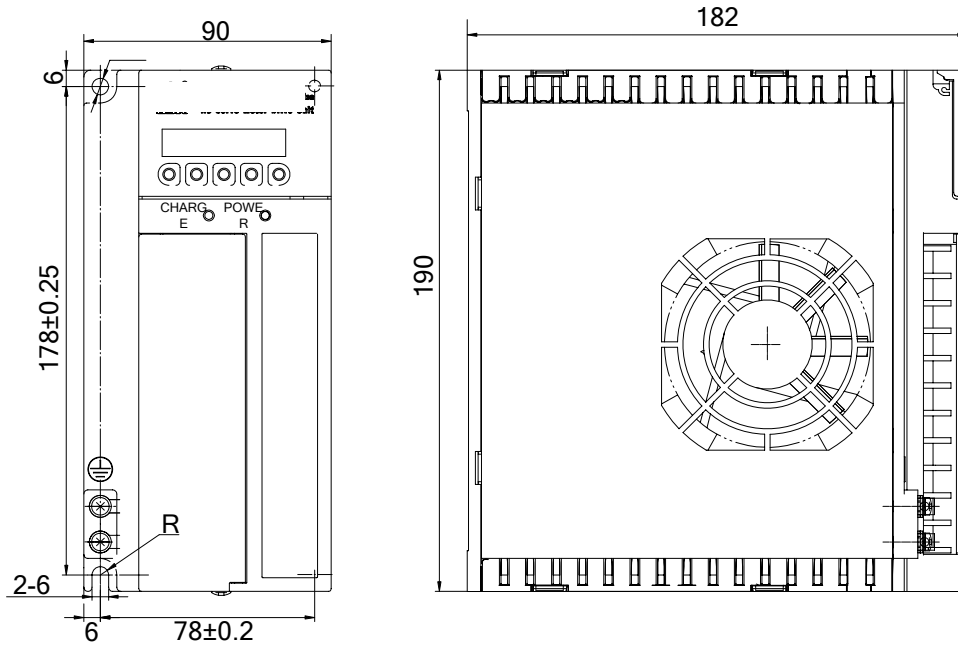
Appearance dimensions of GE2030T (unit: mm)
